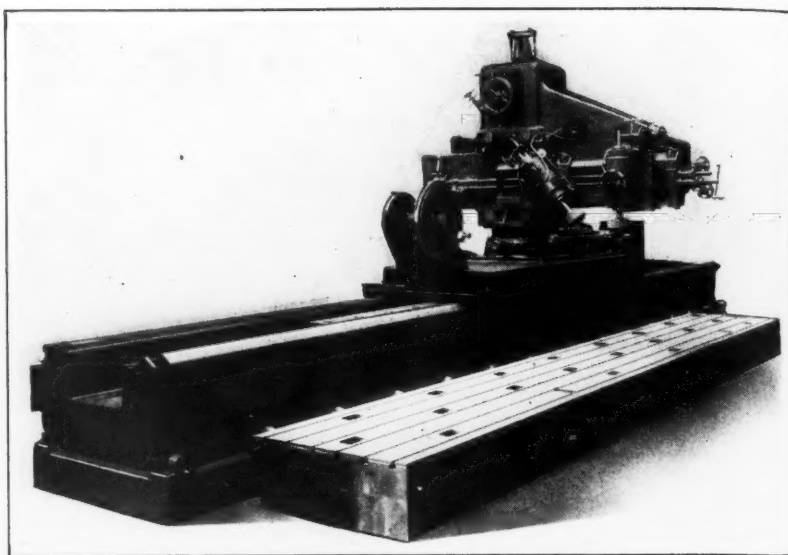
Traversing-head Machine for Grinding the Ways of Lathe Beds, etc.
